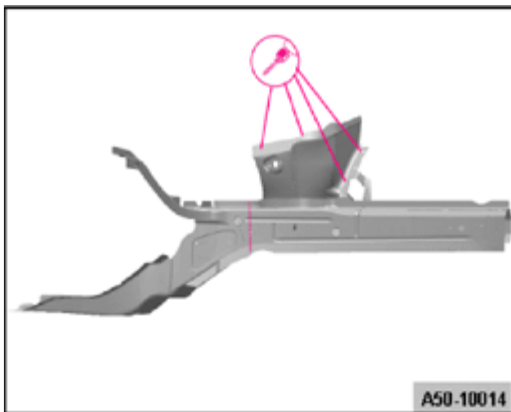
Drilling Holes For Gas-Shielded Arc Plug Weld Seam, 7 MM
